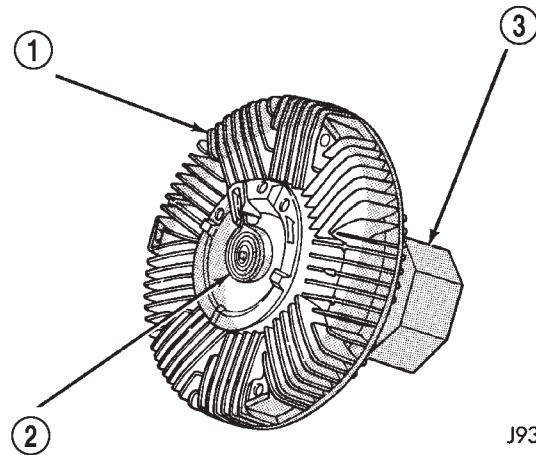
Viscous Fan Drive—3.9L/4.7L/5.9L Engines—Typical
